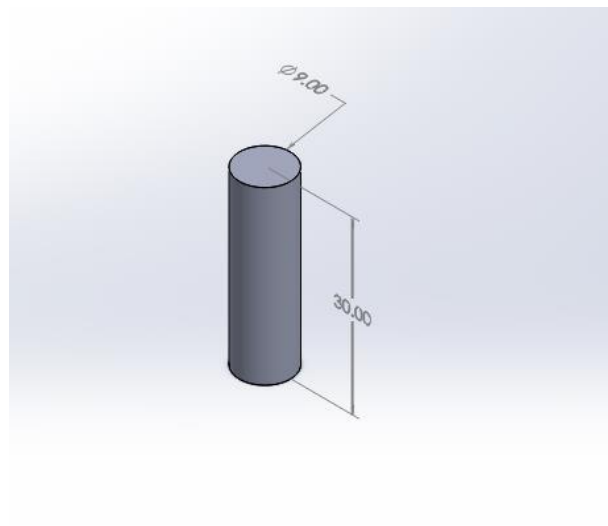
Tensile test Sample, all dimension are in mm
